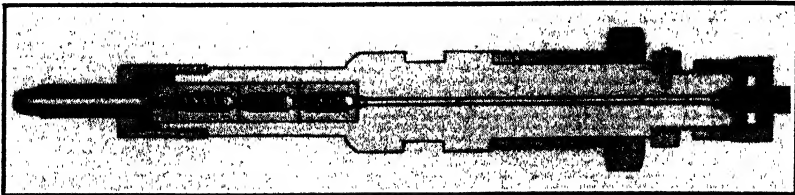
Hesselman open-type low-pressure mechanical-injection fuel nozzle.
